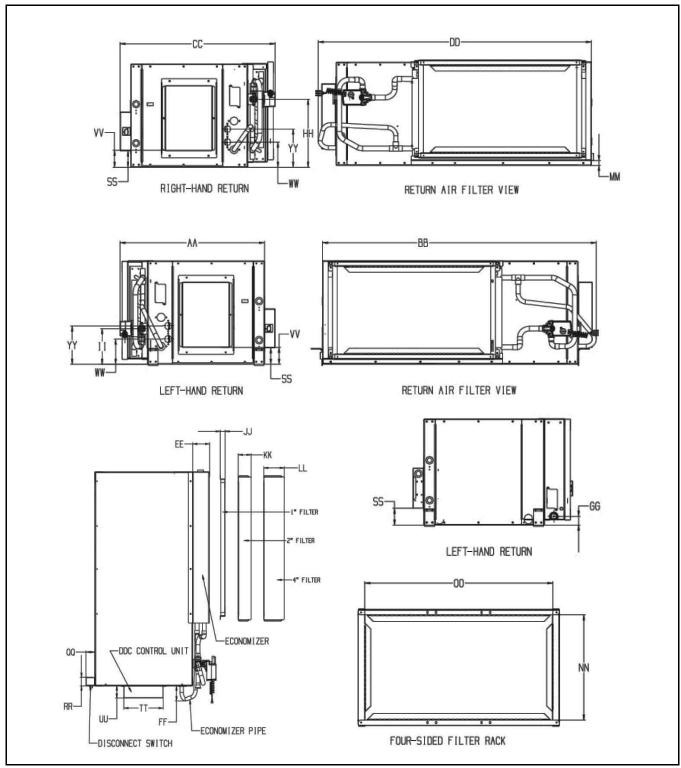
Horizontal (HZ) Cabinet Options Drawing
